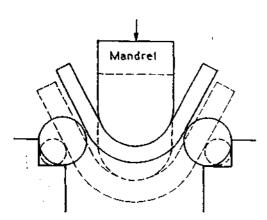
Modification of method illustrated in Fig. 1 by the use of roller supports
